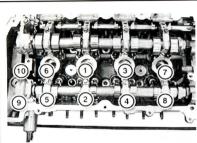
Bearing bridge screw tightening sequence (shown without special tool for clarity)
